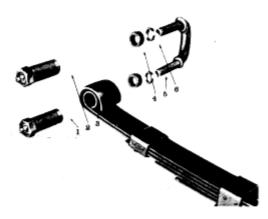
SPRING SHACKLE-RIGHT SPRING
